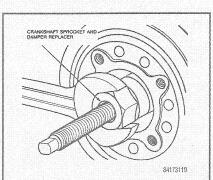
Installing the crankshaft damper with the proper installation tool—5.0L engines
